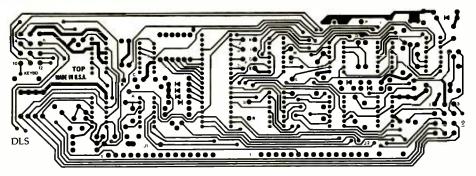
FOIL PATTERN of component side of double sided board shown $\frac{1}{2}$ size.
